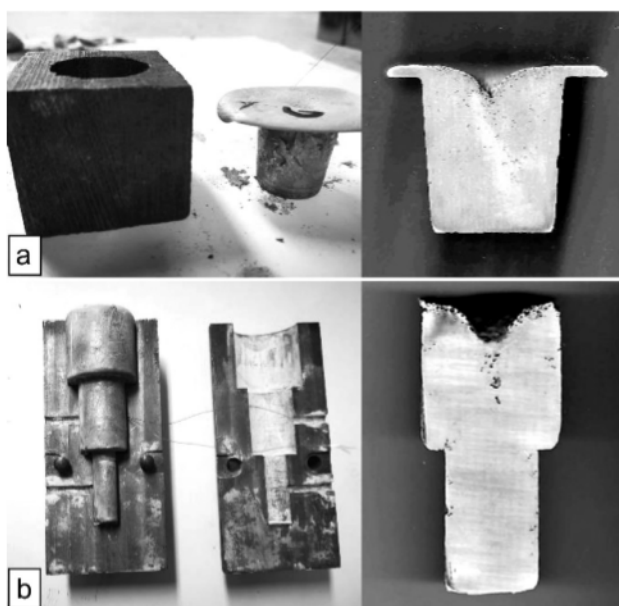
a) Graphite mould with casting and casting cross-section and b) steel mould with casting and casting cross-section
